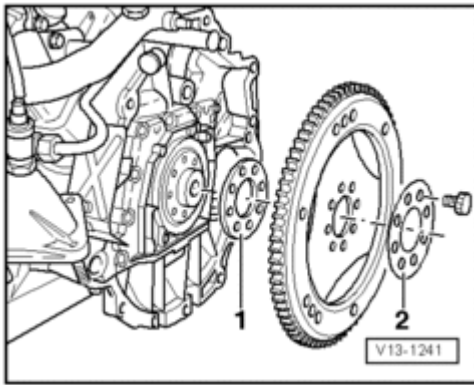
Marking Drive Plate, Shim And Washer To Engine & Removing Drive Plate
